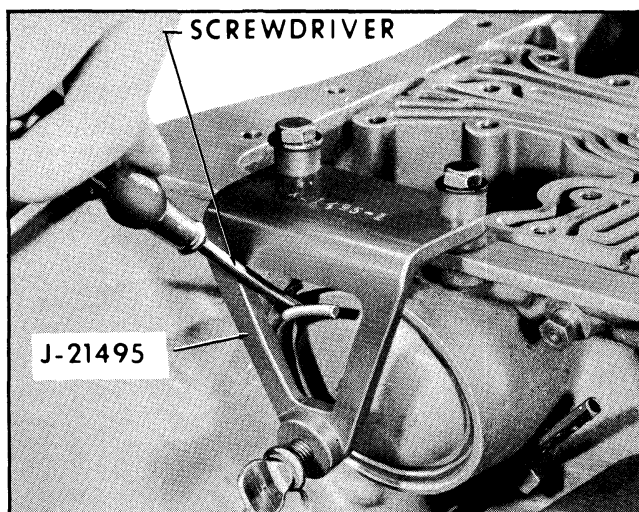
B-58 Removing Low Servo Cover Snap Ring
